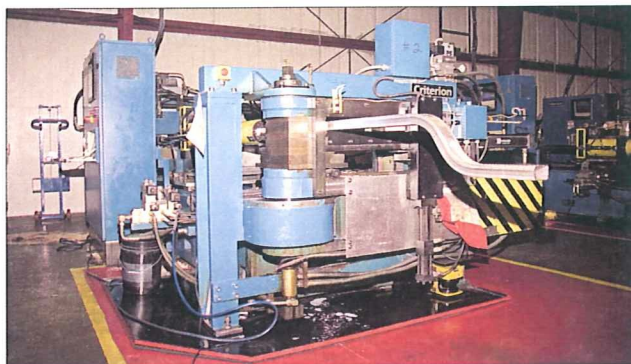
One of the five successive CNC bending operations performed on the AlumiCore side rails at Elixir.
